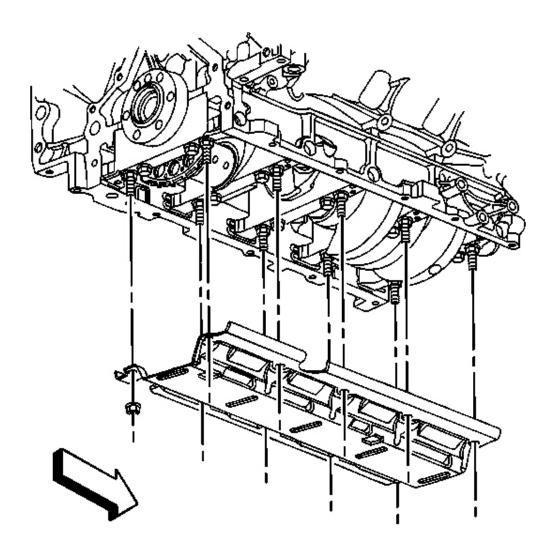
View Of Crankshaft Oil Deflector & Nuts Courtesy of GENERAL MOTORS CORP.
